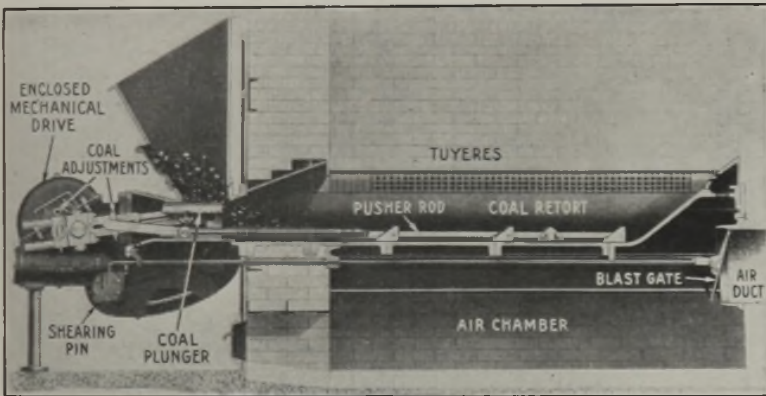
Longitudinal section through Detroit single-retort stoker.
